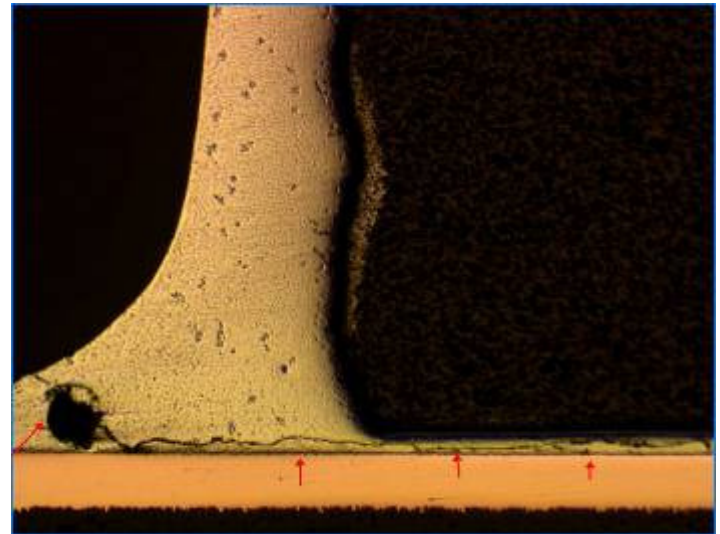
cross section, SN67, U52, left lead solder crack, 100x
